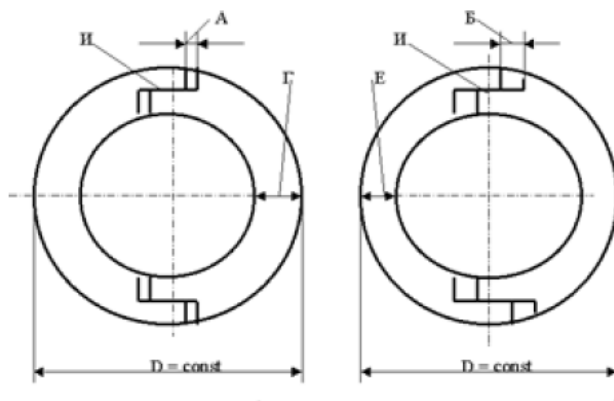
Design of compression rings with solid lubrication and stepped joint of half rings
